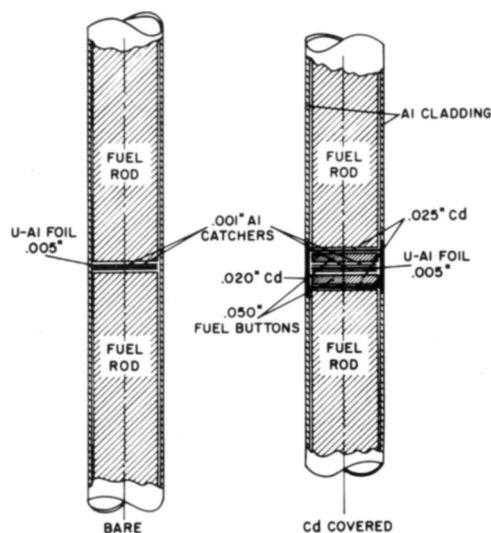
Fuel rod assemblies of bare and cadmium covered foils.
